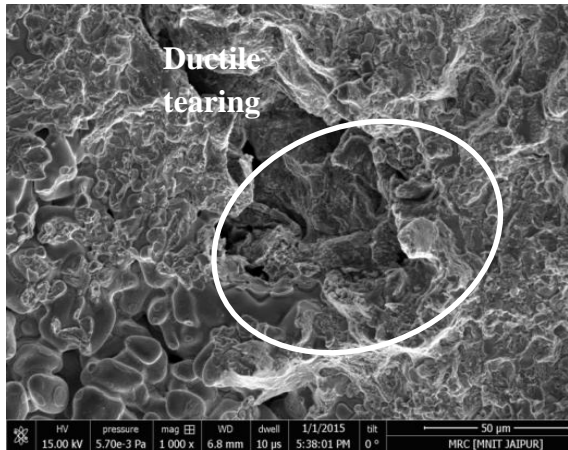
SEM fractographs for 0 wt.-% of CaO particulate filled ZA-27 alloy composites after fracture test
